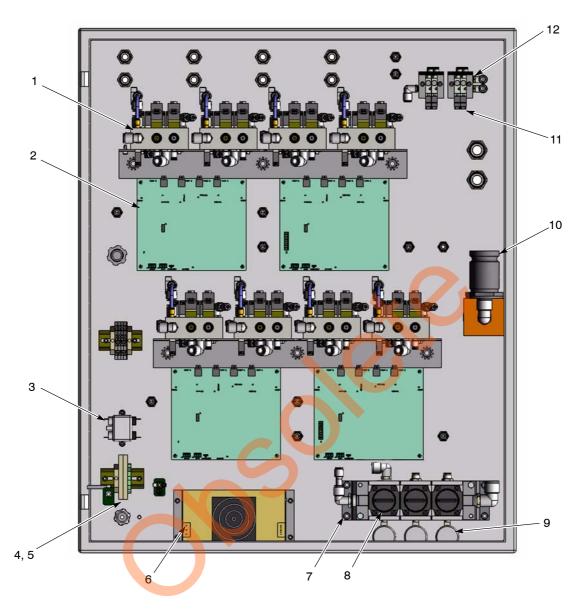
Internal Pump Panel Replacement Parts (Eight-Pump Panel Shown)
